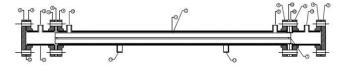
Two Tube Shell and Tube Heat Exchanger
